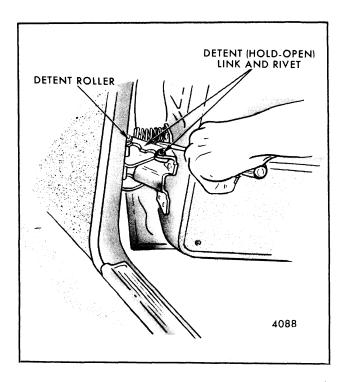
Front Door Hinge "Hold-Open Spring" Removal
